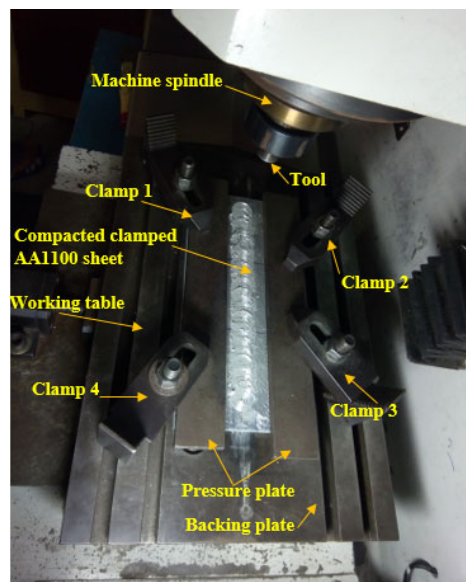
Job setup showing the compacted AA1100 sheet
